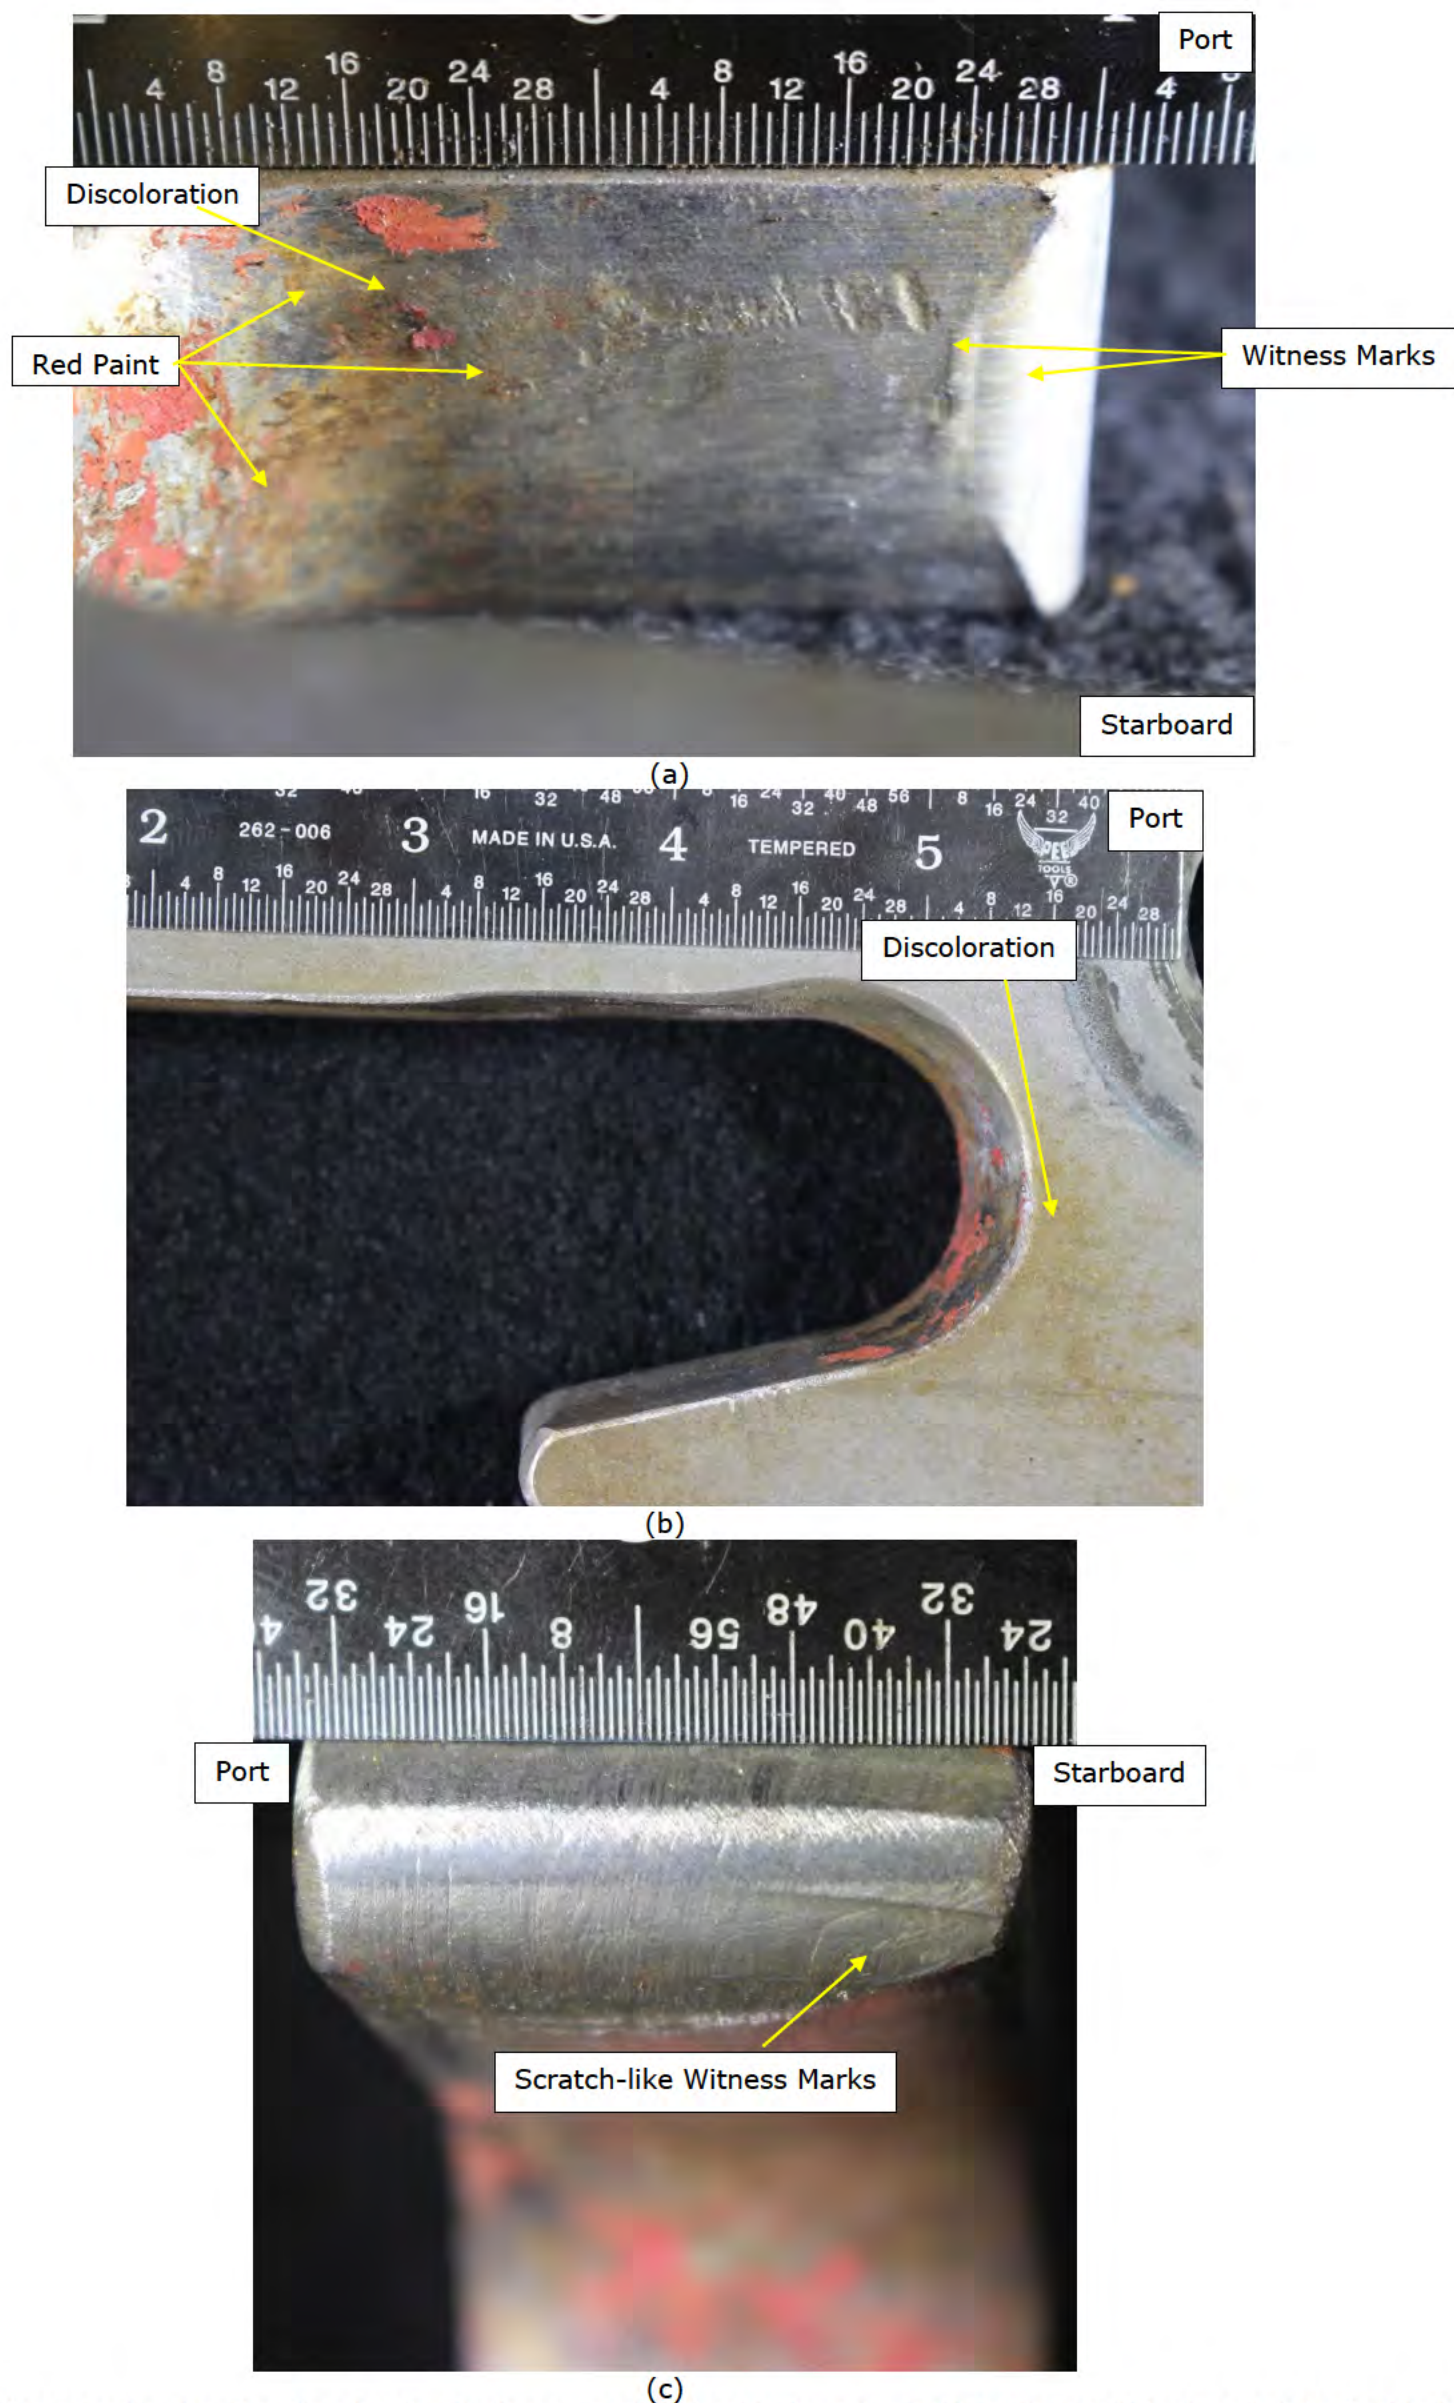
Photographs showing the details of witness marks identified on the Subject Forward Hook at (a) the inside bend of the hook, (b) the edge of the bend as viewed from the port side, and (c) the point of the hook; locations and viewing directions shown in Figure 58 (a) and (b). Rulers are in inches.
